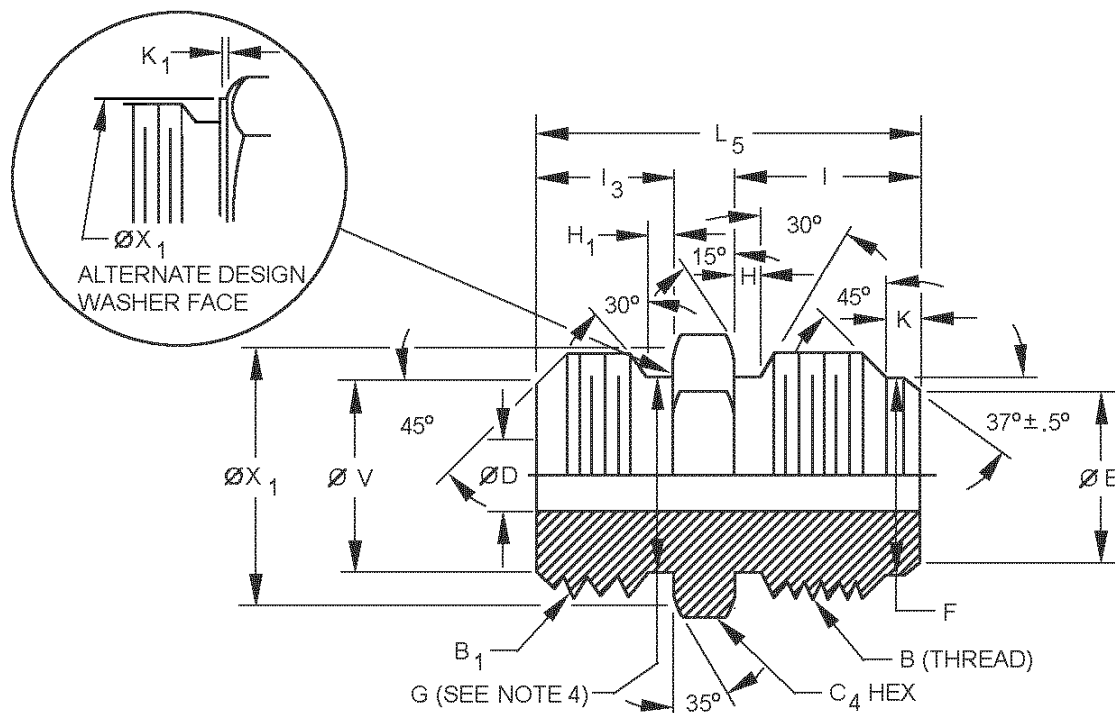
Adapter, 37°, flare to "O" ring boss.
